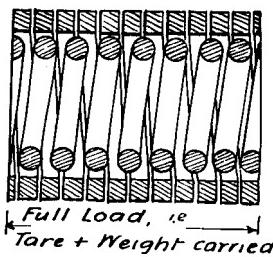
Springs Fully Loaded, both taking a Share of Weight according to Pre-determined Design.
